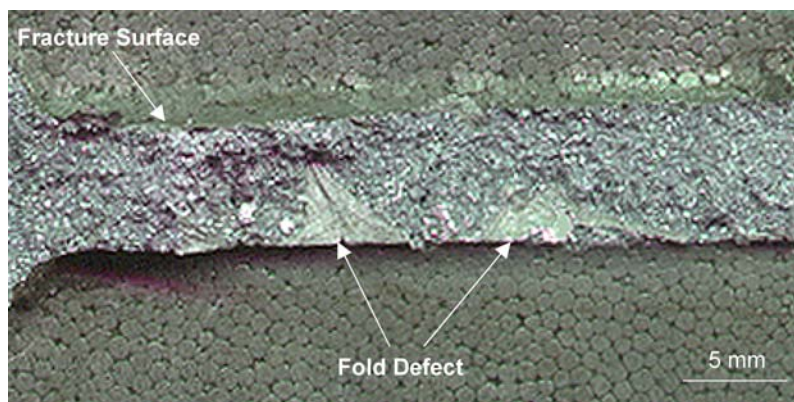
Photograph showing a fold defect on the fracture surface [9].
